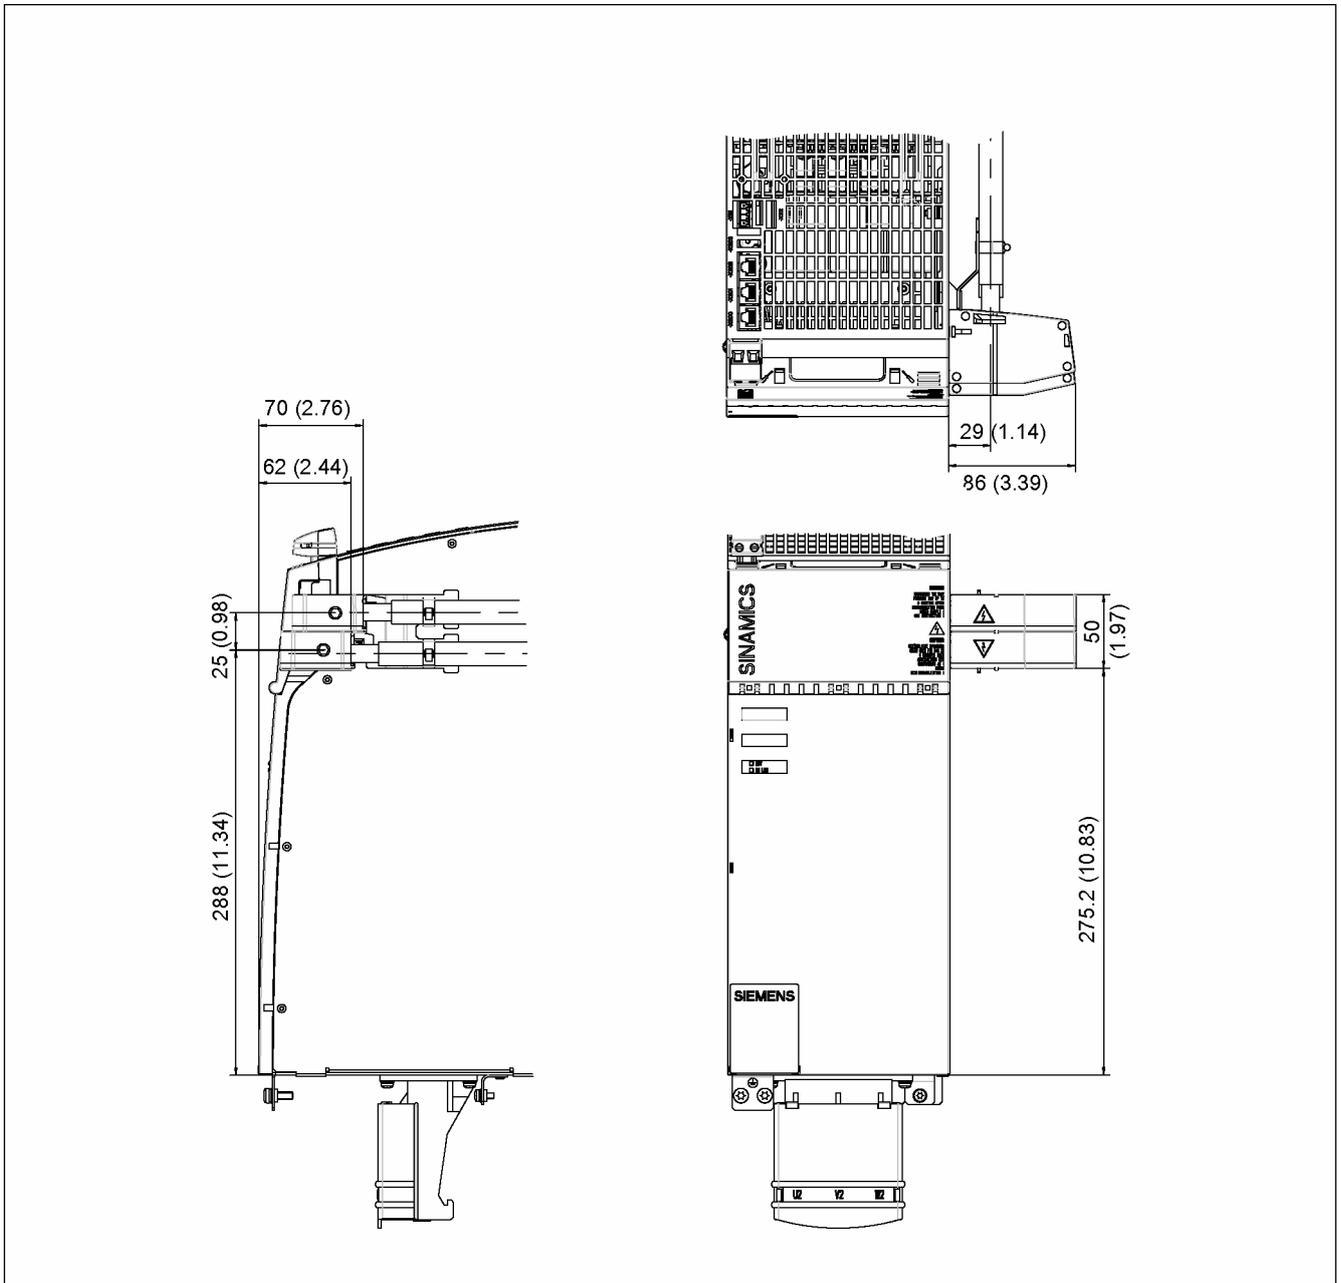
Dimension drawing, 150 mm components with DC link adapter for two-row configuration 35 mm² to 95 mm²
